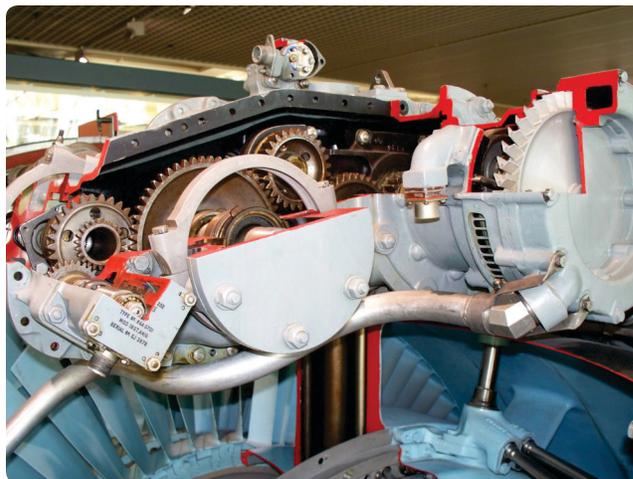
Cutaway view of an accessory case of a Rolls Royce Pegasus engine.
